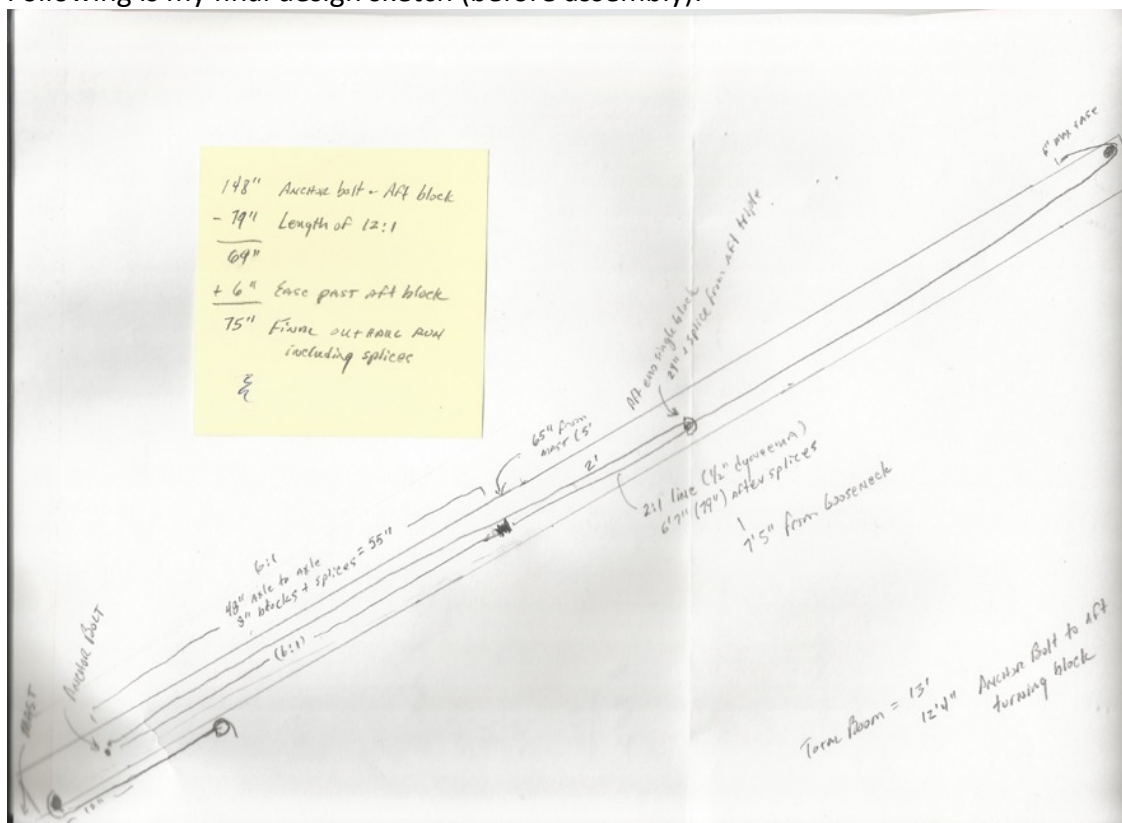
Sketch of 12:1 Final Design, All Measurements Specific to Smiles
